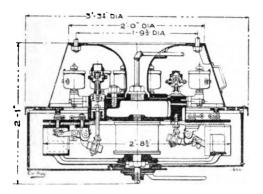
SECTION THROUGH TURRET CONTROLLER.
